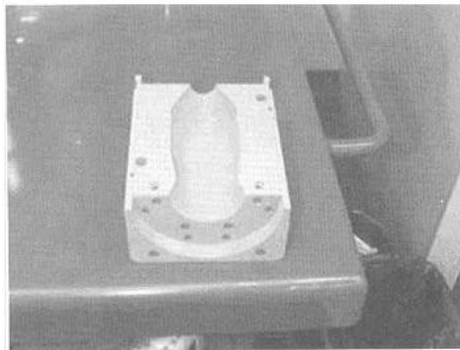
Blow molding pattern built with the Pro Metal system(Courtesy of Extrude Hone Corp.).
